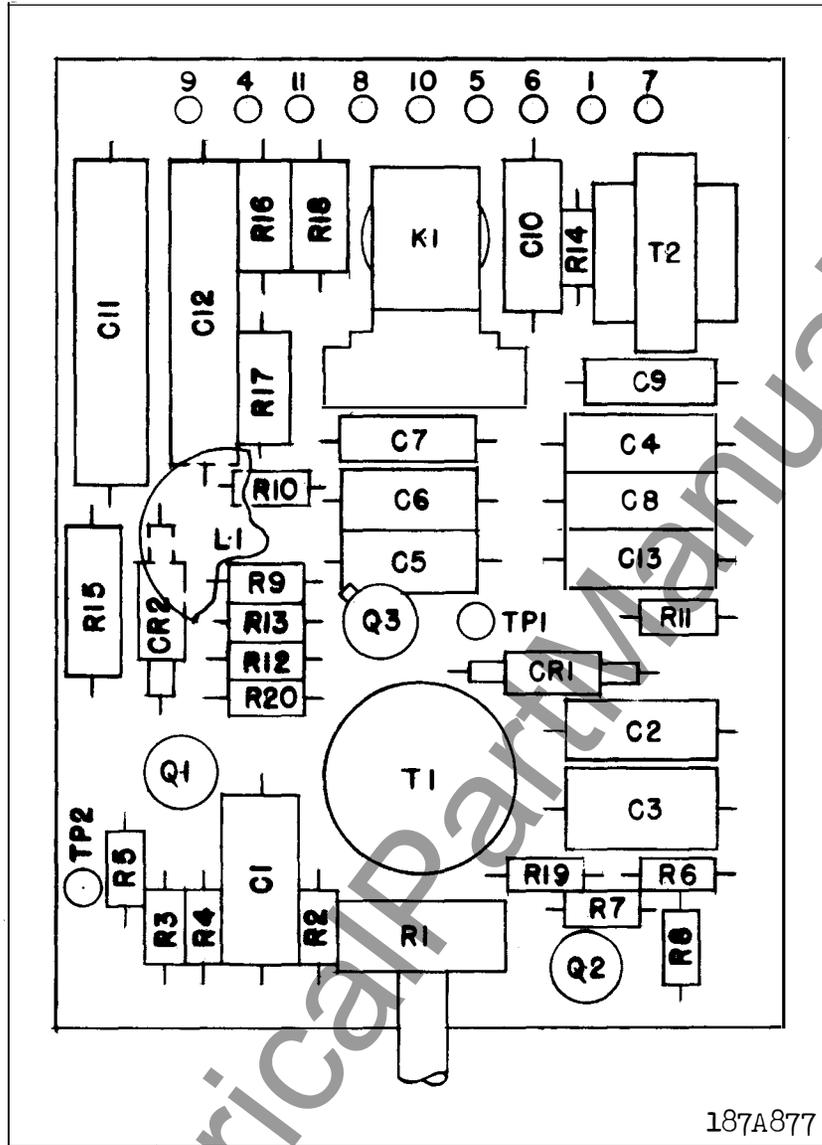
Printed Circuit Board Component Location-Type TC Voice Adapter
